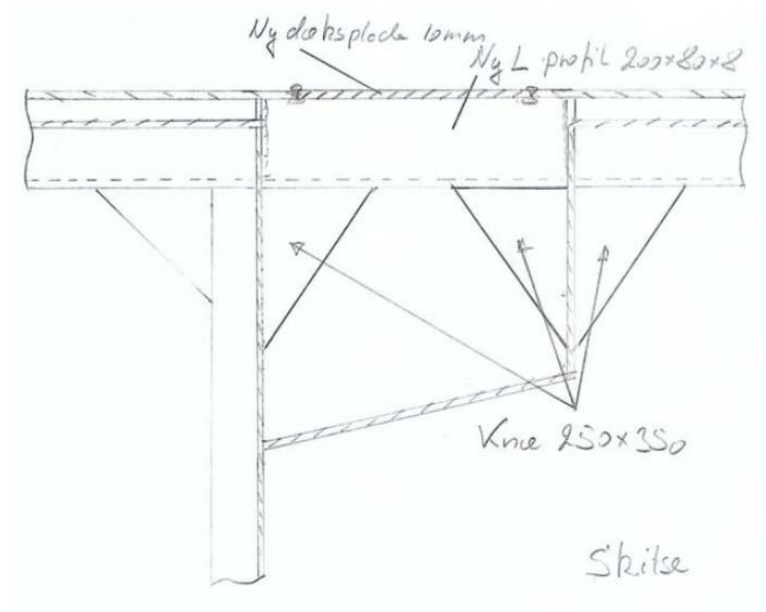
Sketch of arrangement in way of cooling water tank (Reparationsarbejde på M/F Columbus, 28/03/2020)
